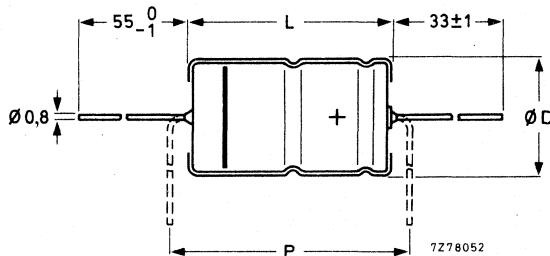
Case sizes 00, 01, 02 and 03. For dimensions D, L and P, see Table 1.
